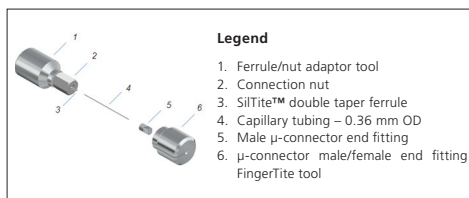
Exploded diagram of the first stage of the  $\mu$ -Union connector installation.
